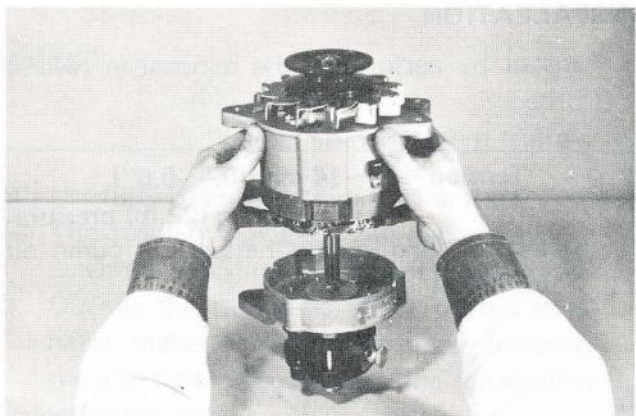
Installing Rear End Frame to Drive End Frame
